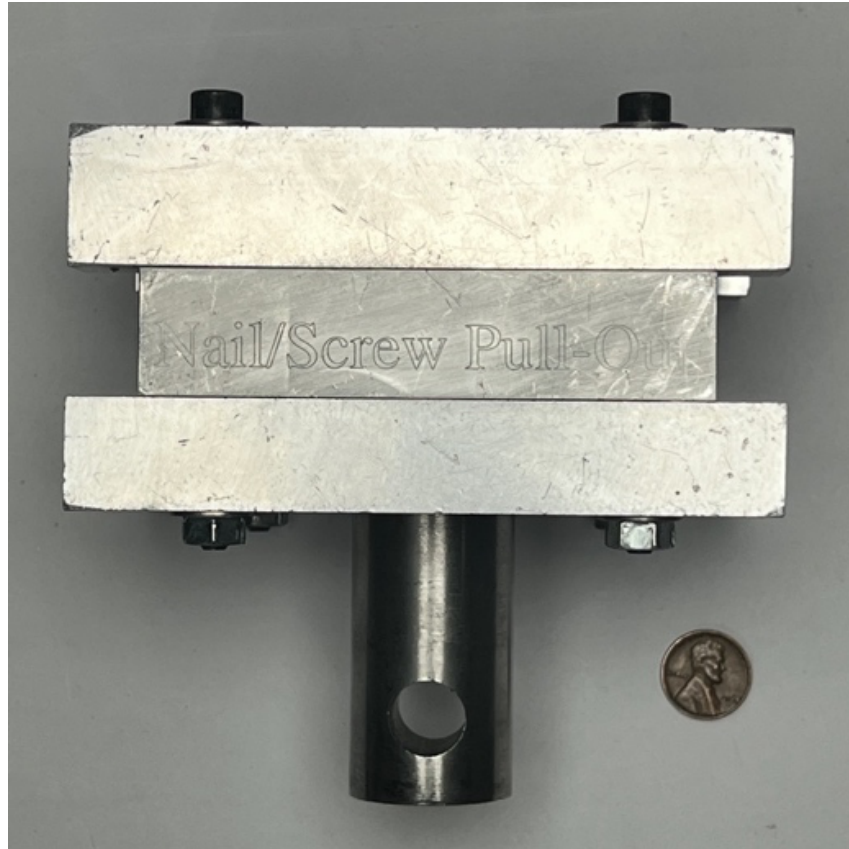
Fastener pull-out fixture (FPOF) head.
